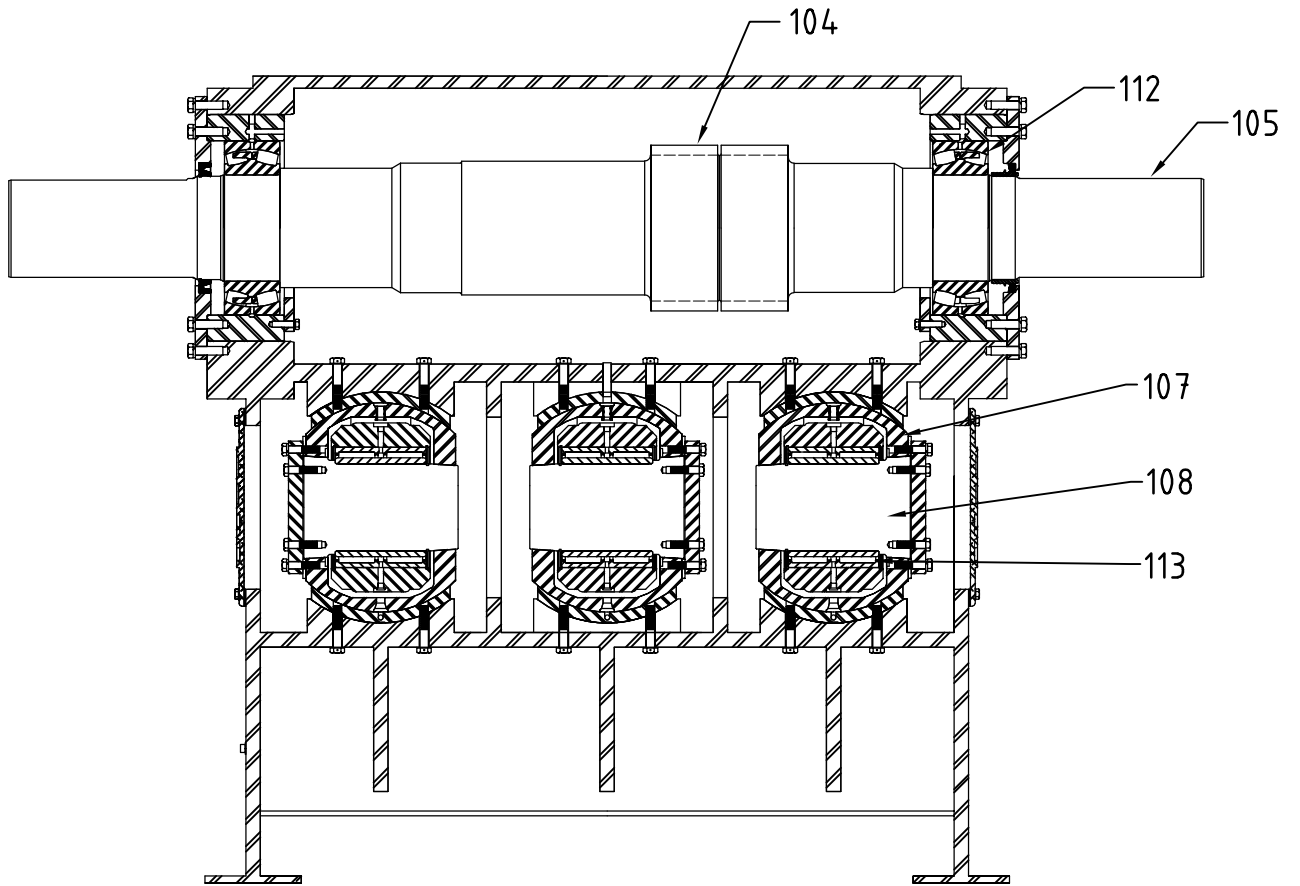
Section through pinion shaft and crosshead (see Table D.1 for nomenclature)
